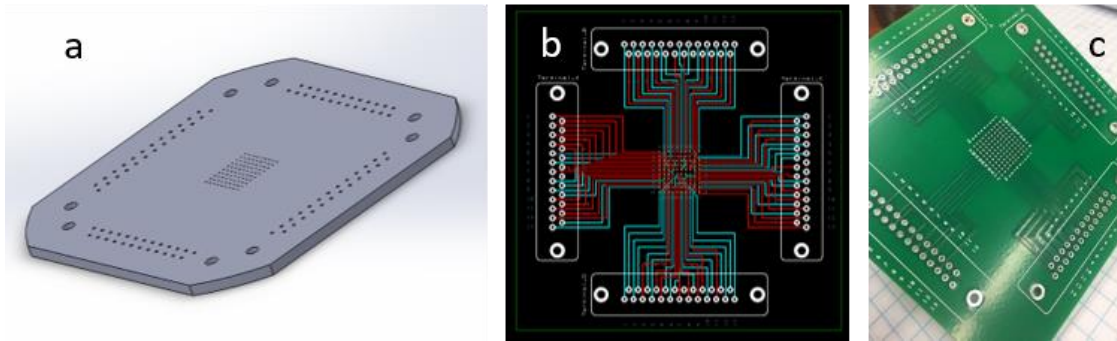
1st generation EP chip PCB design. It has 10x10 needle holders and 4 units 25-pin connector location. (a) 3D model designed in SolidWorks. (b) The PCB layout design with traces built with PCBArtist software. (c) A picture of 1st gen. EP chip fabricated by Advanced Circuits, Aurora, CO.
